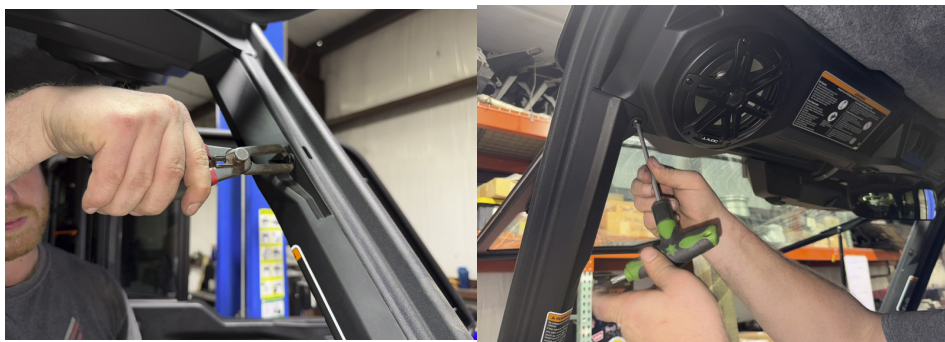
& FIG 13 - Remove fasteners holding A-Pillar plastic tunnel to vehicle
